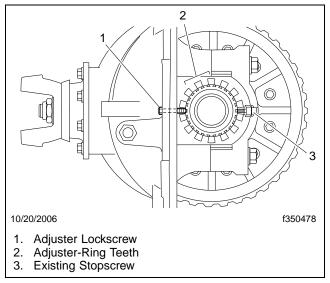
, Adjuster Lockscrew Installed (cross-section view)
